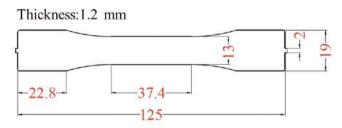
Geometry of the dumbbell-shaped specimen designed according to ASTM D638 $\,$
